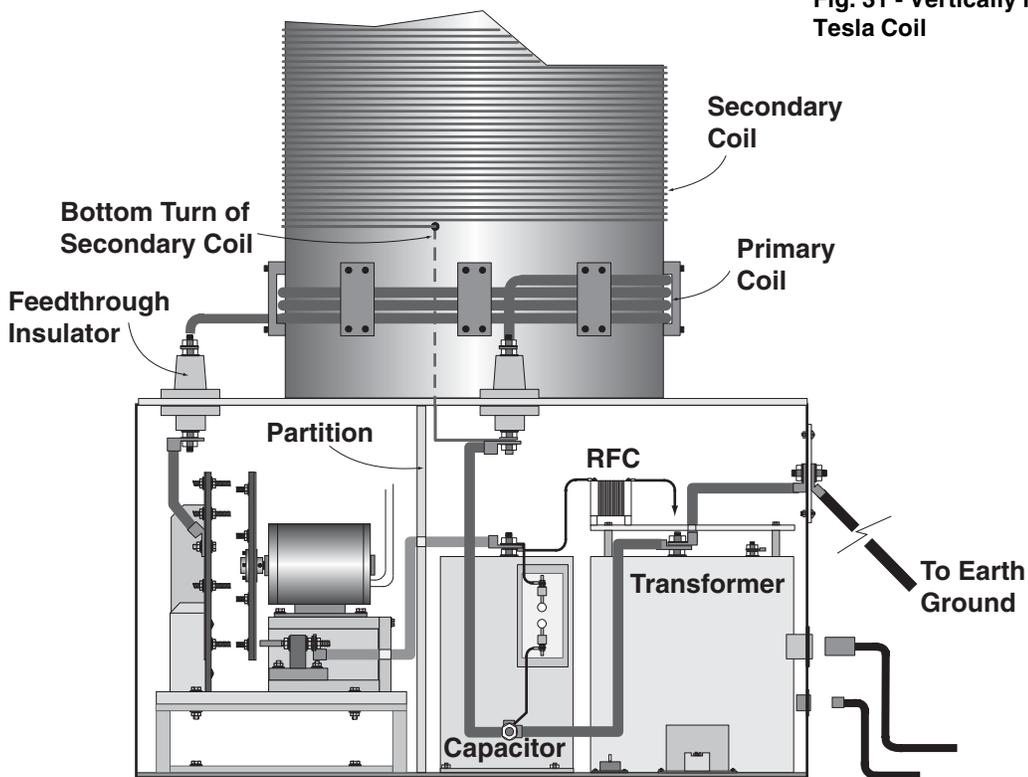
Parts Layout for Vertically Mounted Tesla Coil
